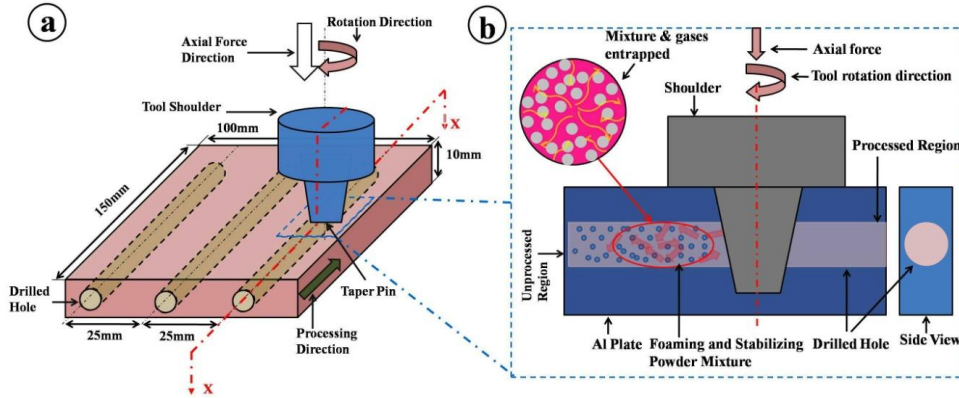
(a) Buried hole technique and (b) process mechanism
